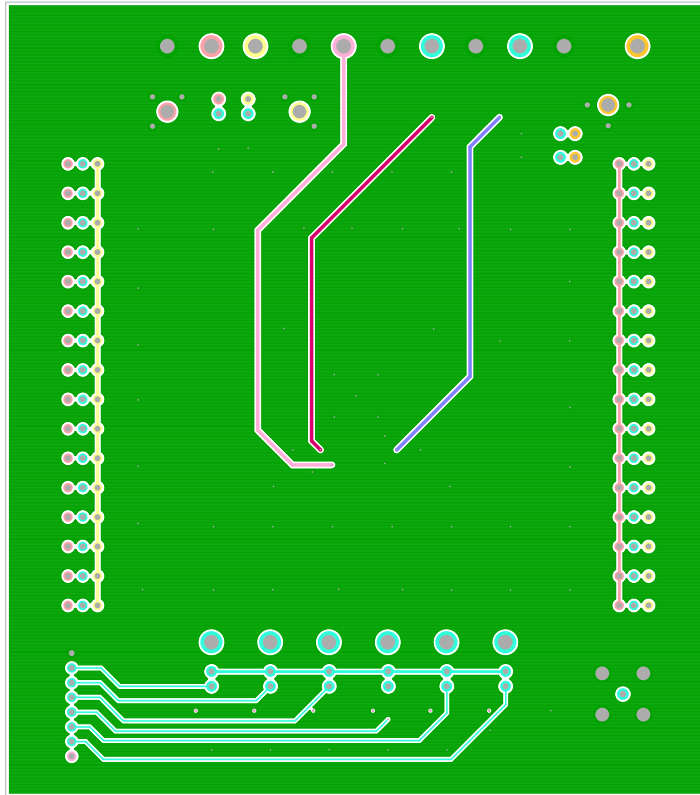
PCB - INNER LAYER 2 (TOP VIEW)
